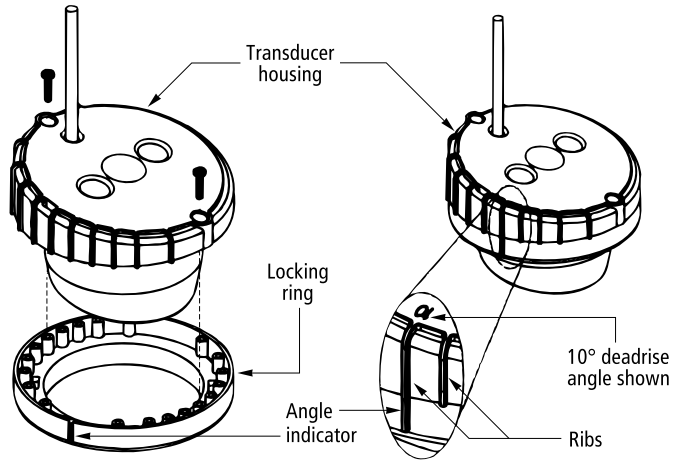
Joining the Transducer Housing to the Locking Ring
